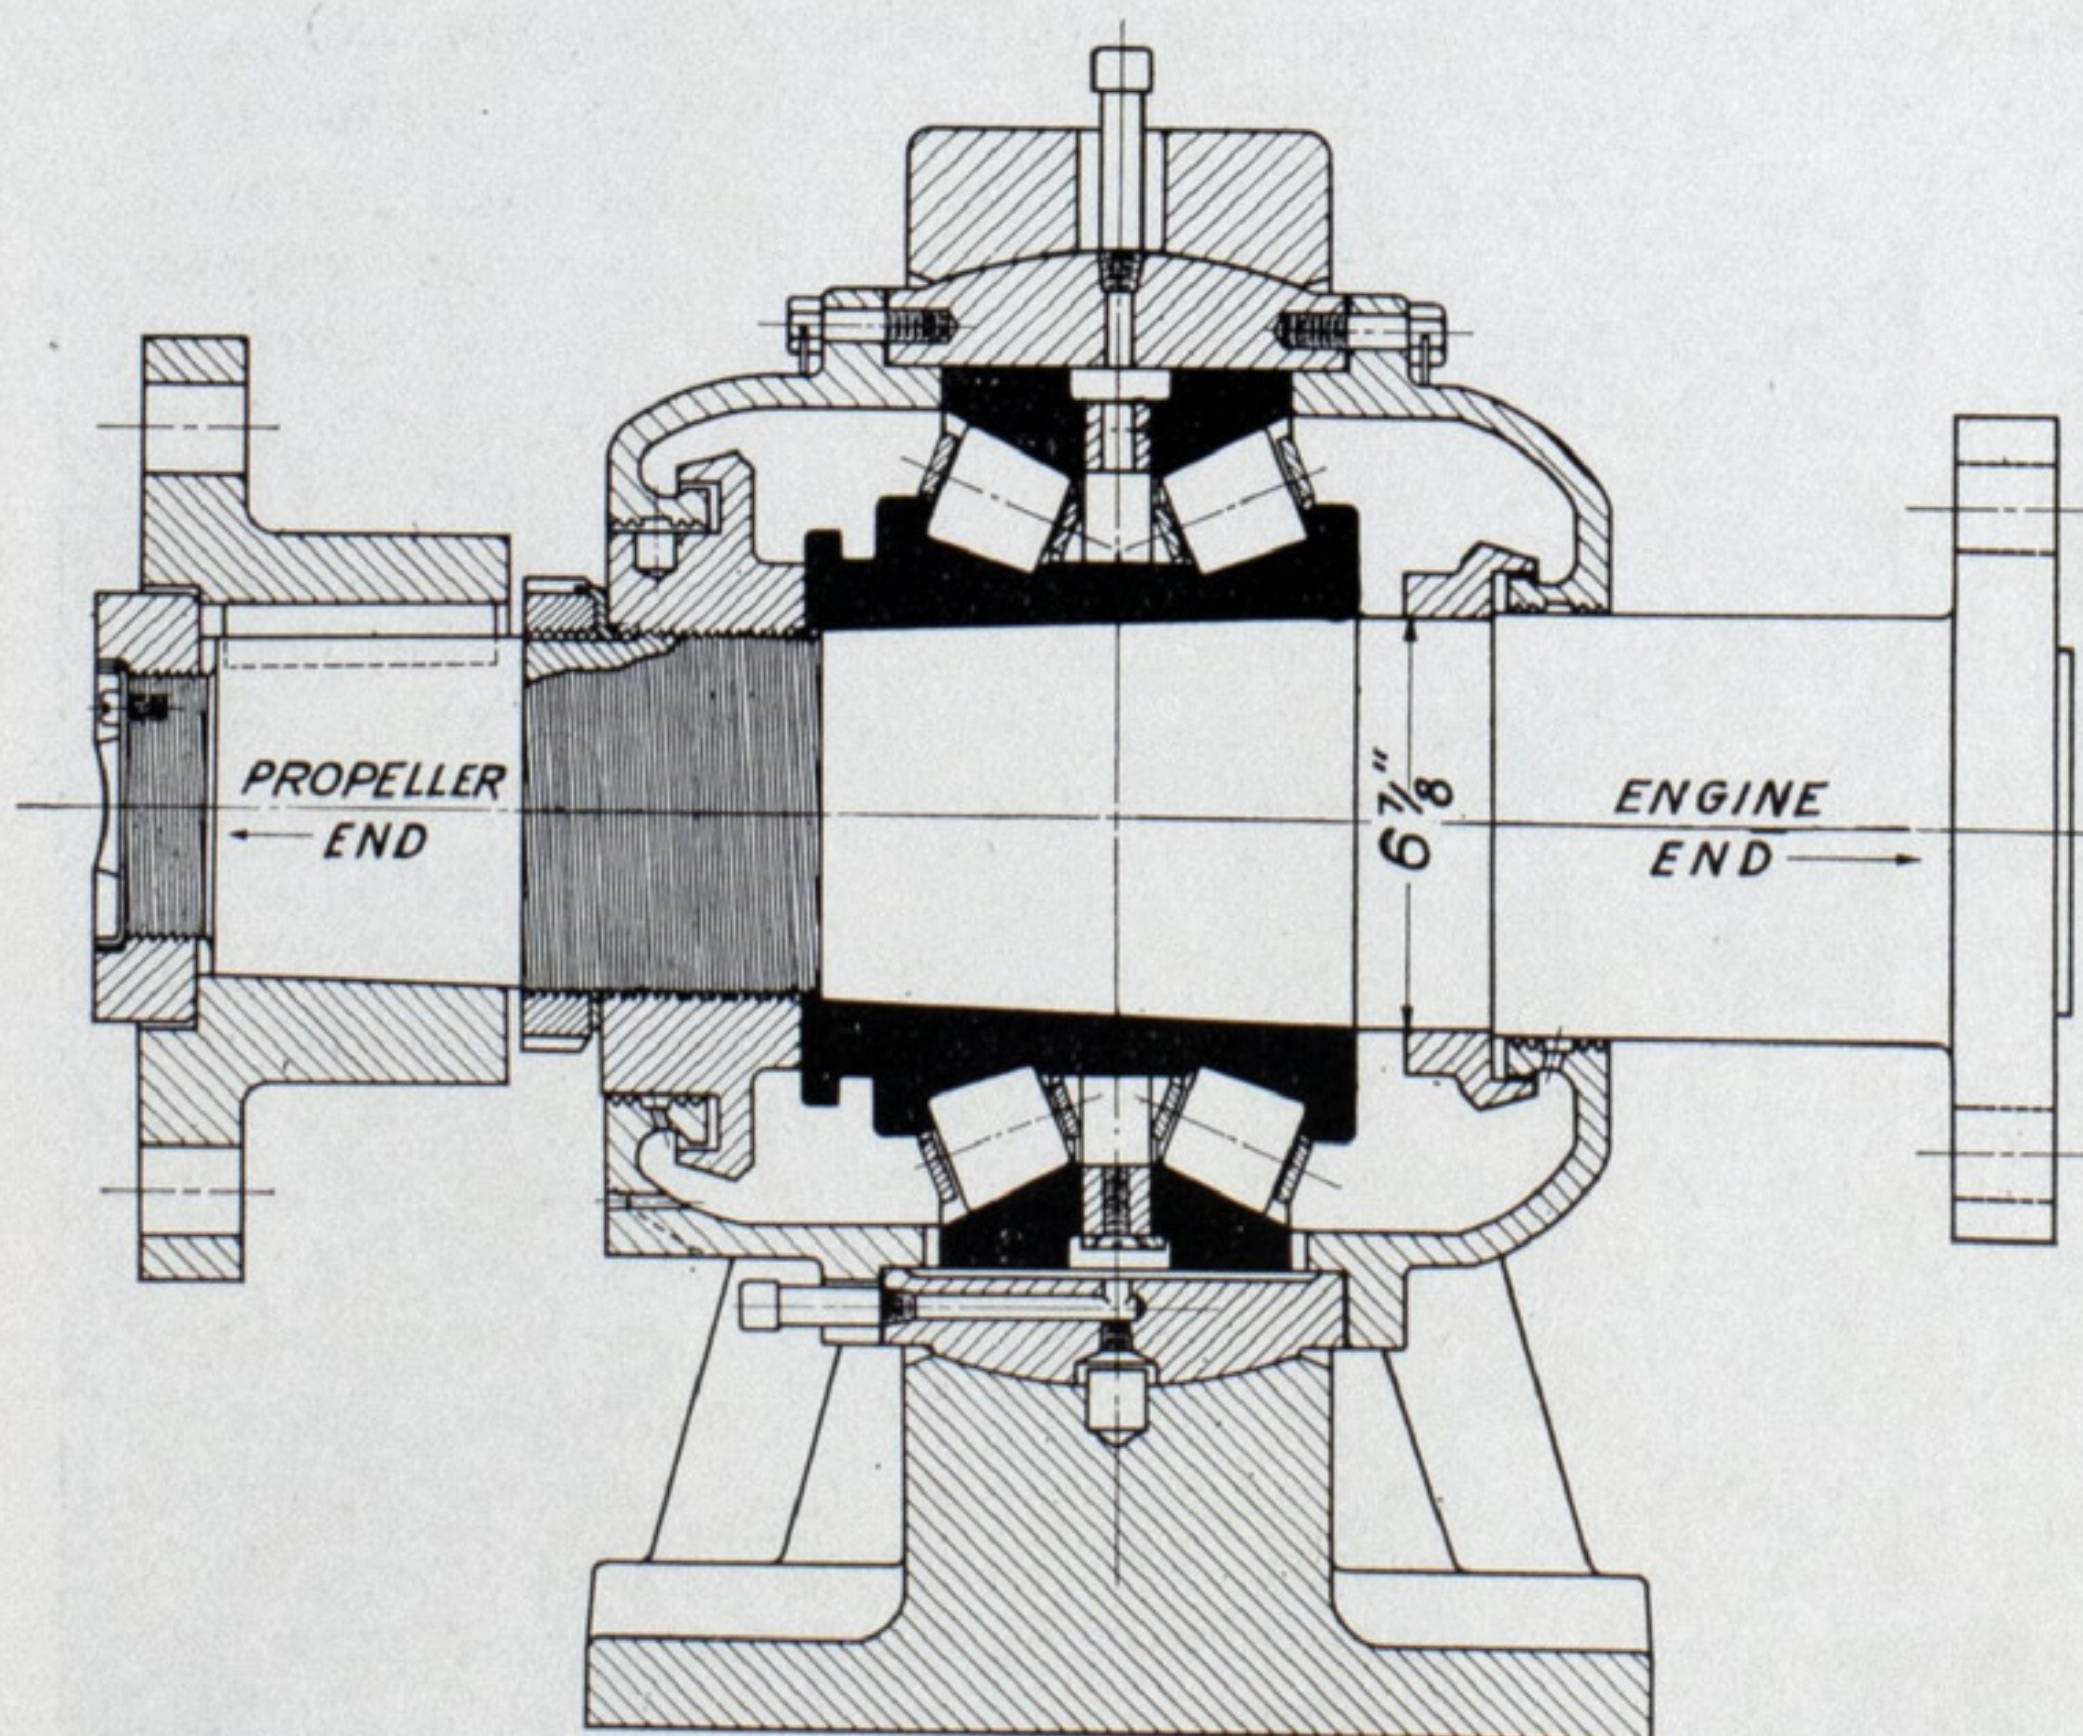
Tapered roller bearing thrust block for the new Coast Guard harbor cutters. Carries propeller thrust load and also serves as a supporting bearing for propeller shaft
